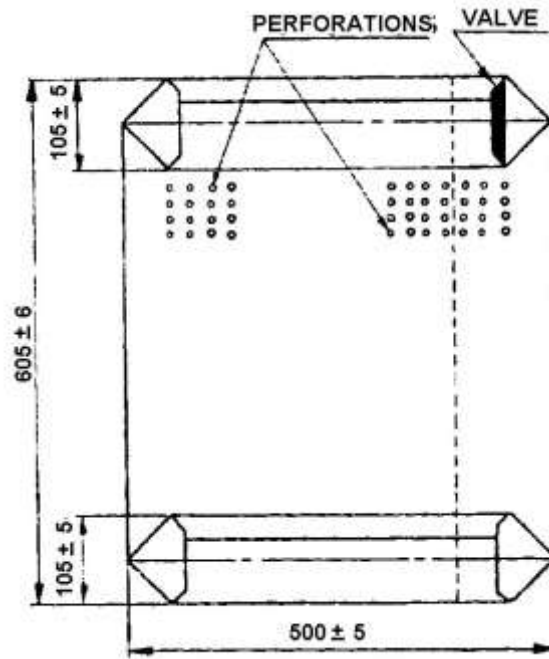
Paper sacks for packaging 50-kg cement (valve pasted end type)
